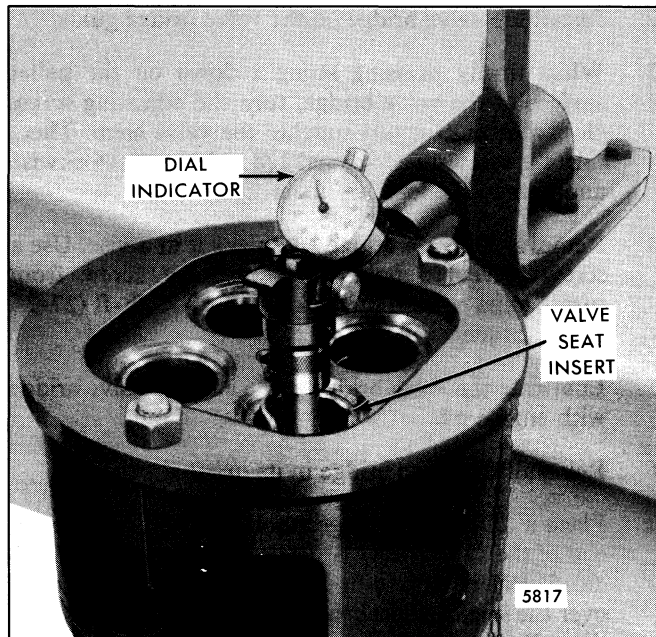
Checking Relative Concentricity of Valve Seat Insert with Relation to Valve Guide
